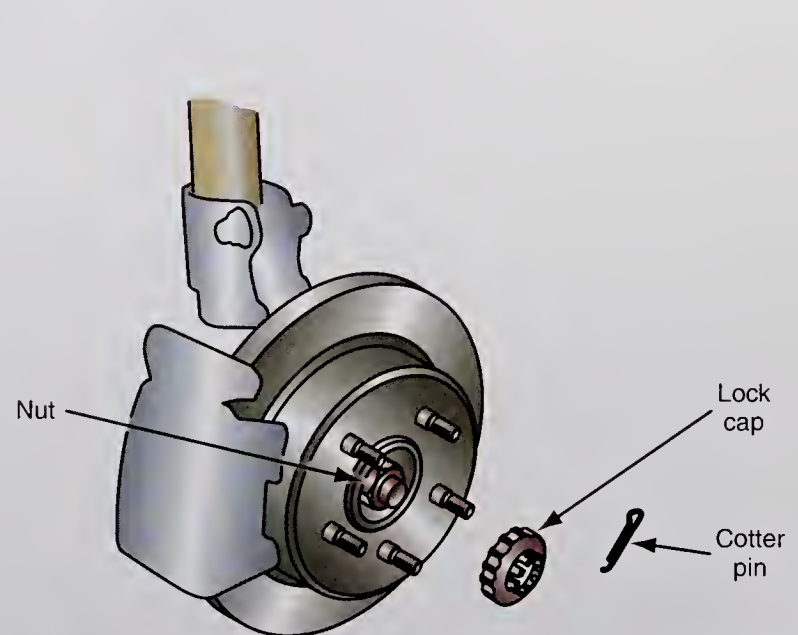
Removing the drive axle cotter pin, lock, cap, and nut.
